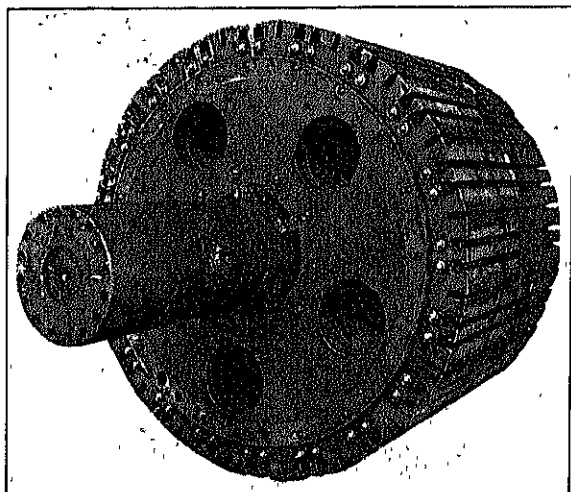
Spider built up of $\frac{1}{4}$ -in. steel plate punchings for 33,000-kva, 360-r.p.m., vertical type generator.
